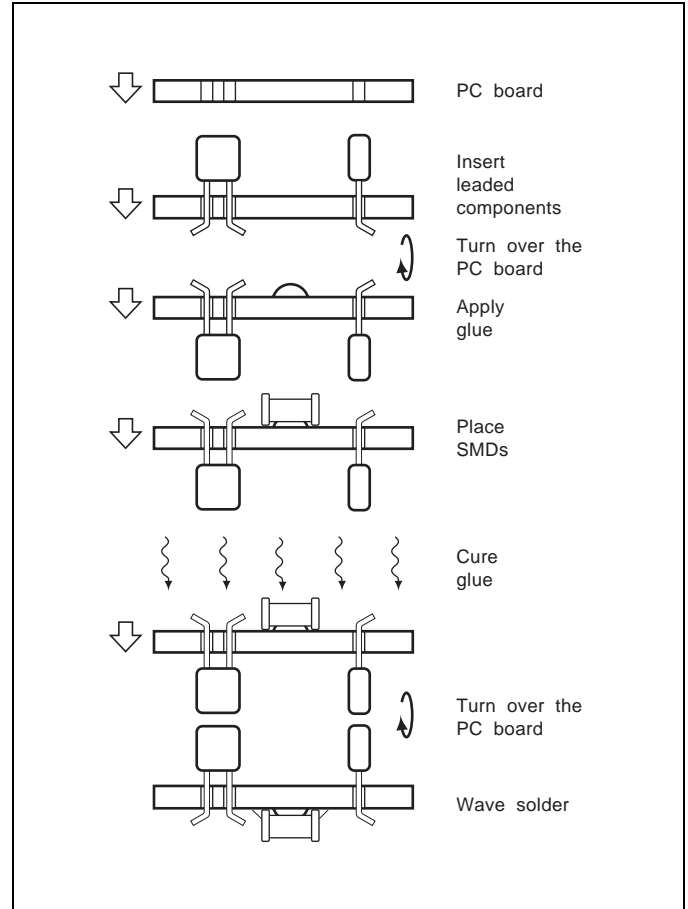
Wave Soldering PCBs With Both Surface Mount and Leaded Components
